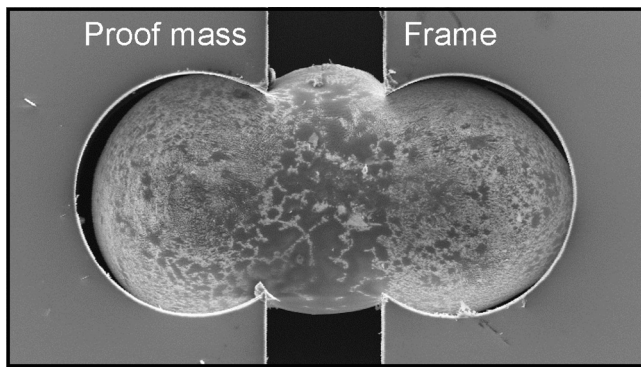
Opposing solder bumpers combine upon reflow due to an excess of solder within the limited geometry.
